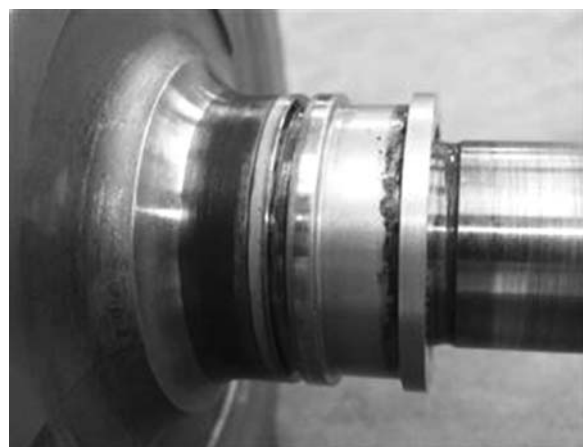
Seal-bush after 10,000 hours use (after cleaning)
